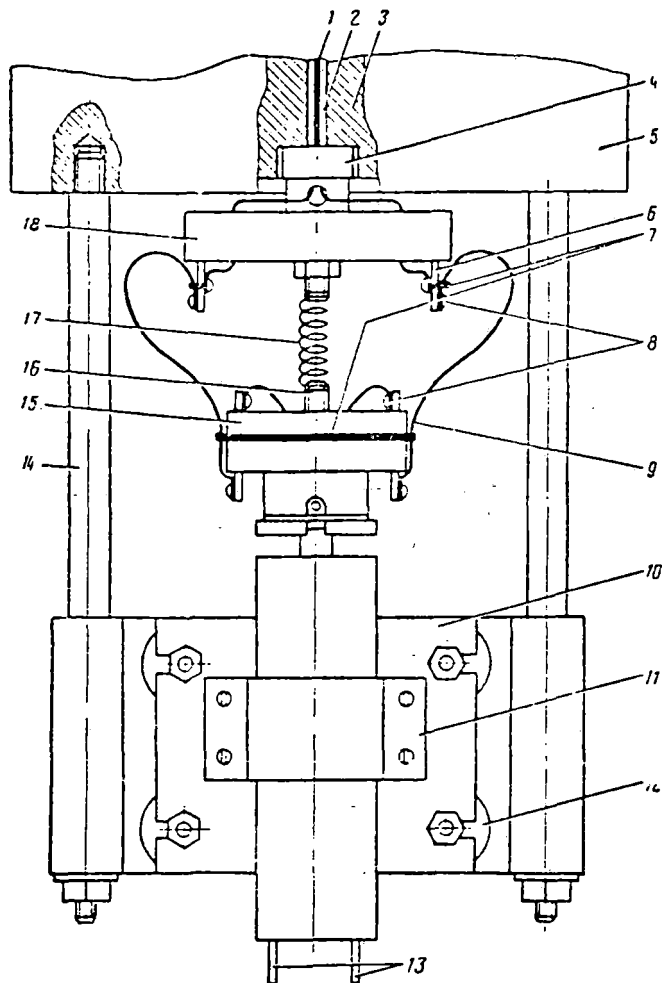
Installation of a current collector on the axle box of a tenso-metric wheel pair (top view): 1--cord; 2--hole in the end of the axle; 3--axle of the wheel pair; 4--fastening cleat with bushing; 5--axle box housing; 6--block contact; 7--clamping-down device; 8--soldering points; 9--connecting line; 10--bed of the collector; 11--clamping-down cleat; 12--rubber shock absorber; 13--output terminals of the current collector; 14--fastening pin; 15--insulating bushing of the current collector; 16--bushing; 17--spring; 18--contact box.
